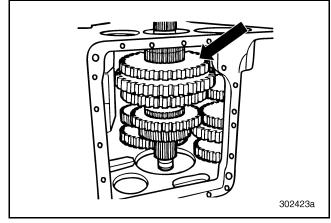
Sliding Reverse Gear and Lo/Reverse Clutch Forward
